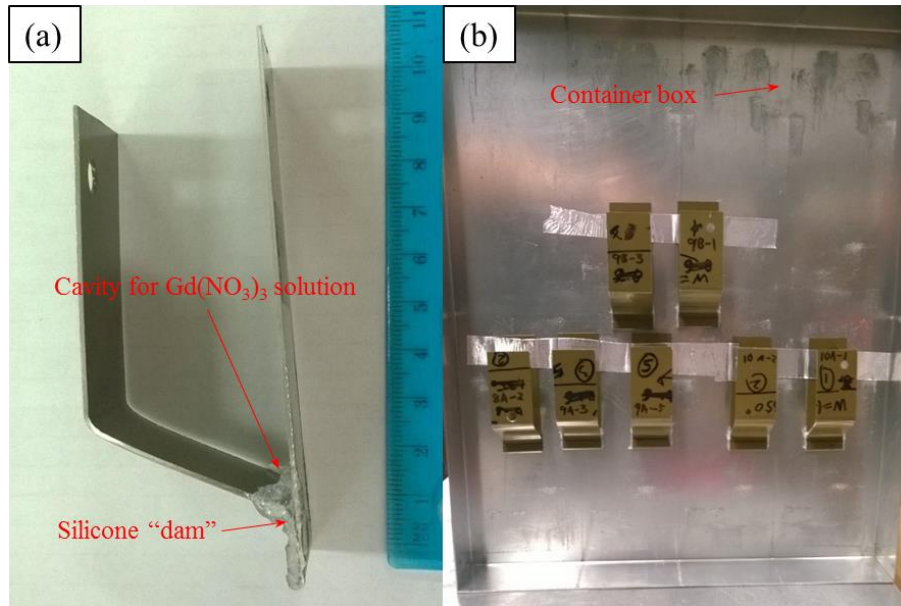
(a) Side-view image of a hem flange coupon with both edges sealed by silicone. (b) Photograph of the hem flange coupons fixed onto a container box and held in the vertical position.
